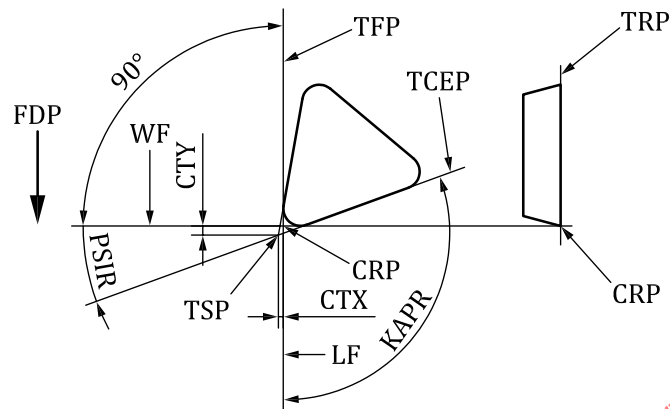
Feed direction perpendicular to tool axis — $KAPR > 90^\circ$
